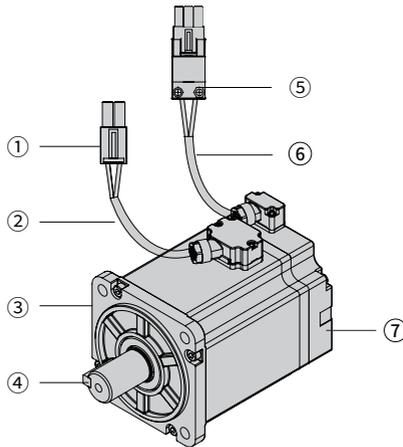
Components of lead wire-type motors in flange sizes 40, 60, and 80
